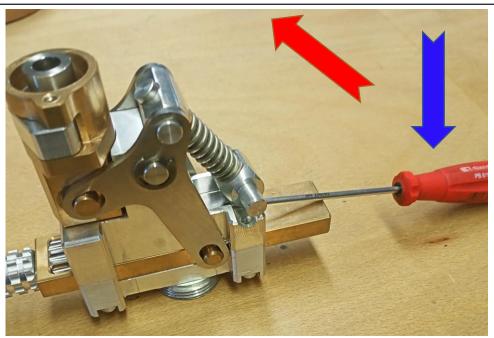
Lower the screwdriver handle (blue arrow) until it goes over the spring guide pin (red arrow), first on one side and then on the other. Be very careful when making the stepping over, place a cloth over the spring to prevent the spring guide from flying away.
